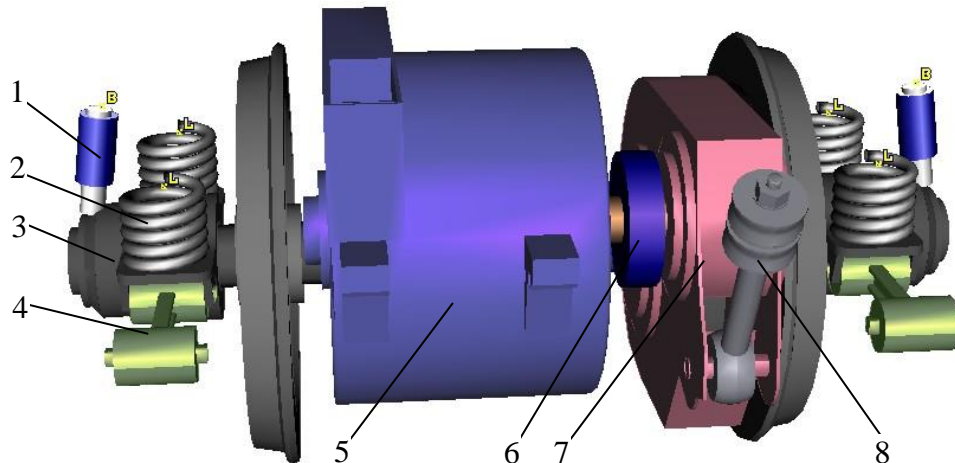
Model of wheelset-motor assembly: damper (1), primary suspension (2), axle-box (3), traction rod (4), traction motor (5), elastic coupling (6), reduction gearbox (7), reducer suspension rod (8)
